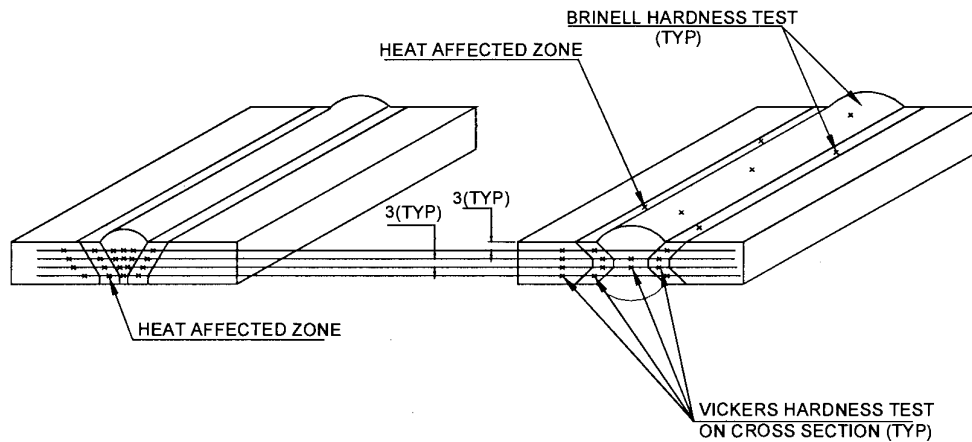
HARDNESS REQUIREMENT ON TEST COUPONS
